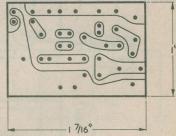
The transmitter printed circuit assembly. This has to be small and compact in order that it may fit into the case specified signal is obtained at the receiver. Otherwise the receiver will be saturated even with R4 well off tune, and there will be no setting which produces a definite peak.
